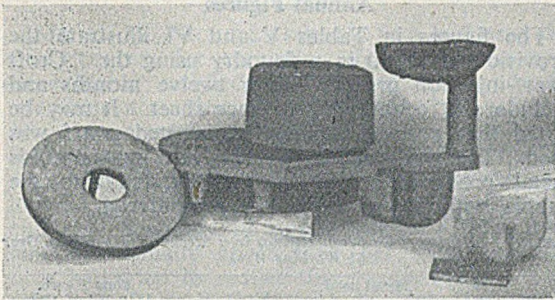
Largest Coupling of the Range Produced (see Fig. 10), showing the Knock-off Core and Cast-iron Skimming Gate (right) and Pattern for its incorporation in the Mould.
